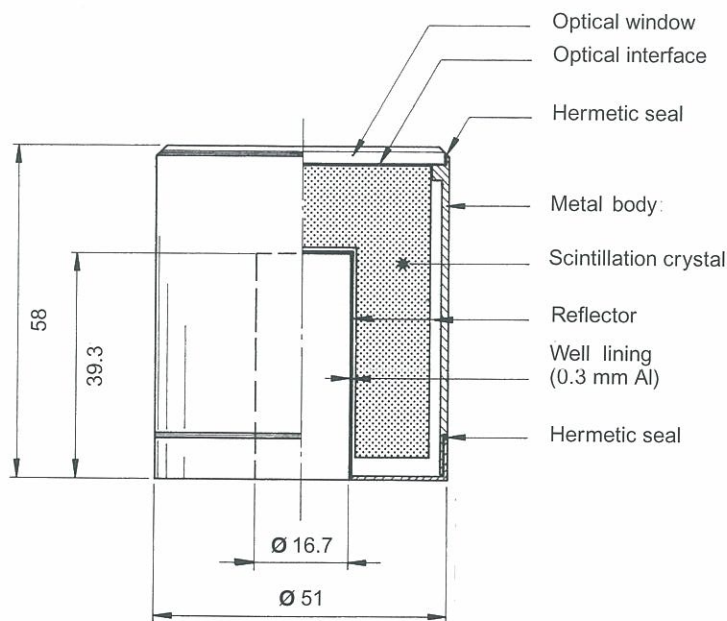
Example of CP-style assembly: 51 CP 51.
